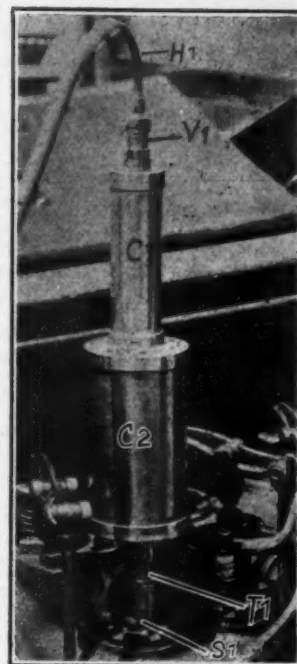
The pump screwed up in place of a spark plug on the cylinder of the motor
